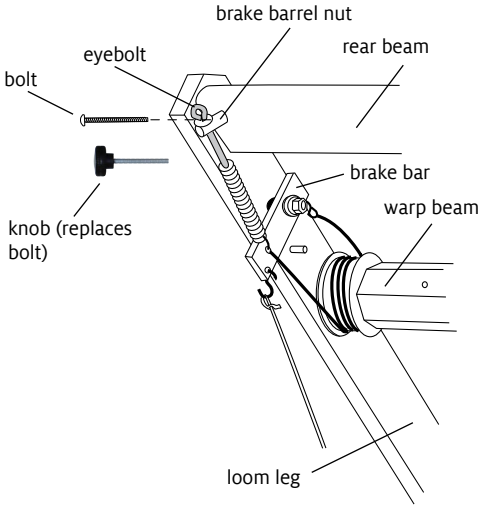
REAR BEAM AND BRAKE - LEFT SIDE
